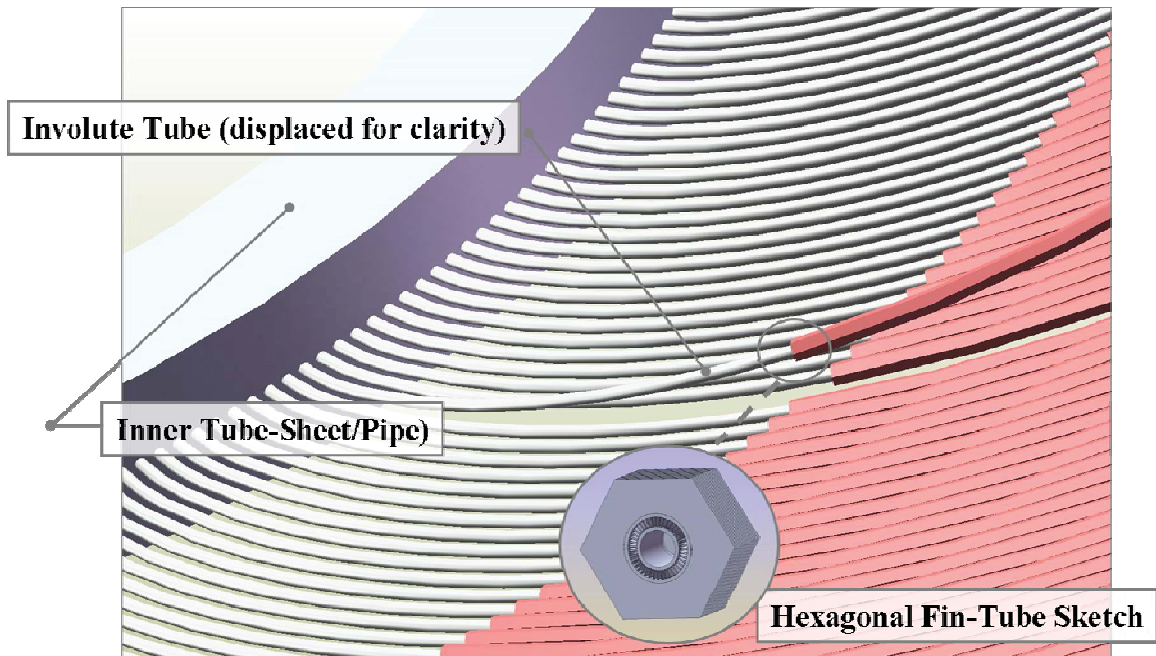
Involute-Tube/Inner-Tube-Sheet Detail
